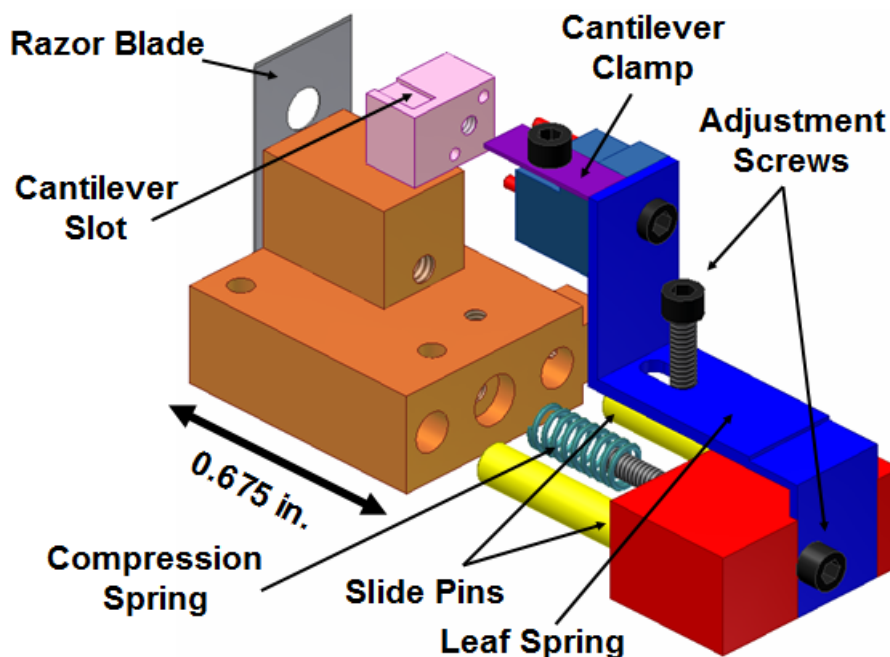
Exploded view of the most recent design of the FIB milling fixture used to prevent cantilever movement during FIB milling and provide a conductive path to ground to reduce electrostatic charging near the tip.
